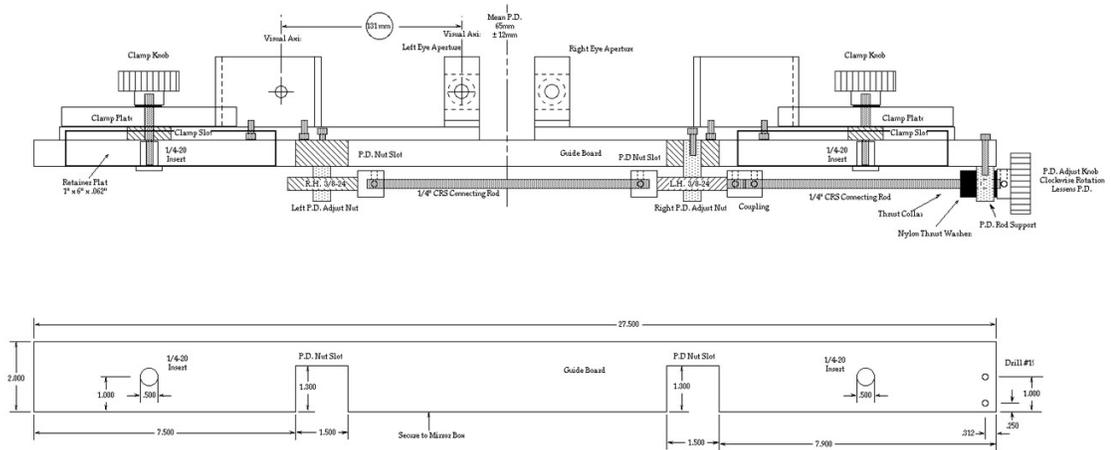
Periscope assembly, front view. Drawing courtesy of Rehder Development Company.
